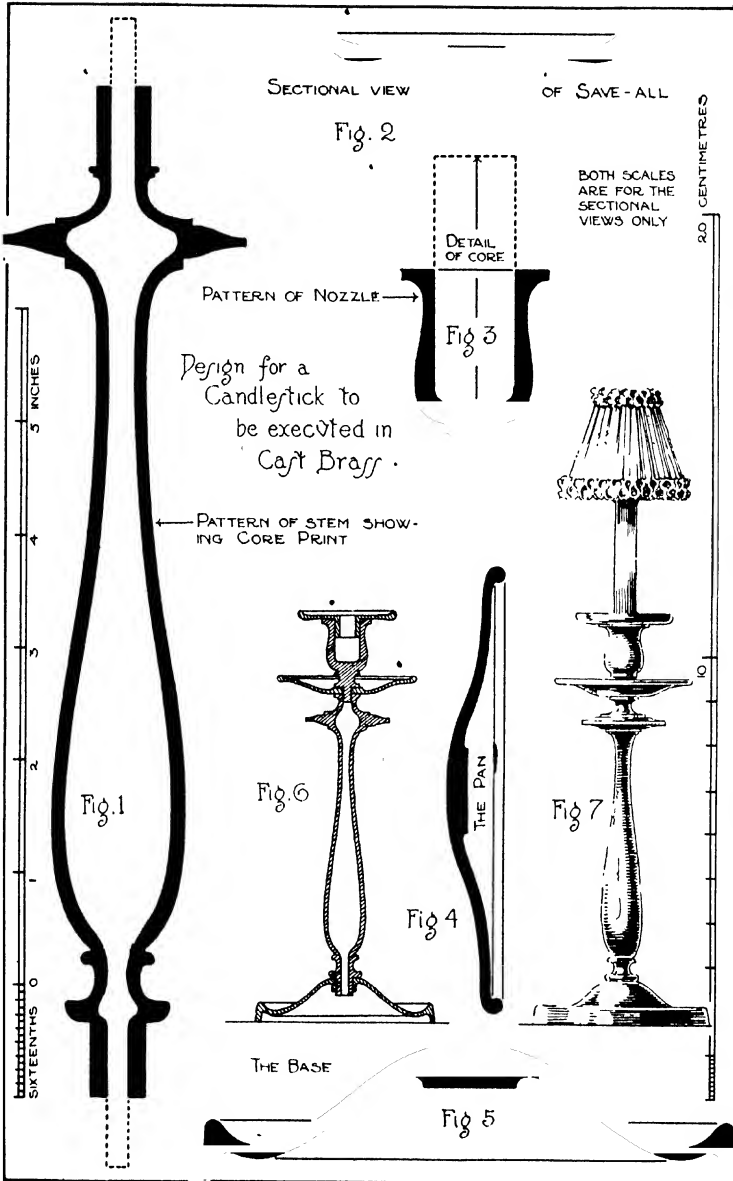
A candlestick in turned brass. Shaded section shows method of construction, thick black lines being sections of castings.
